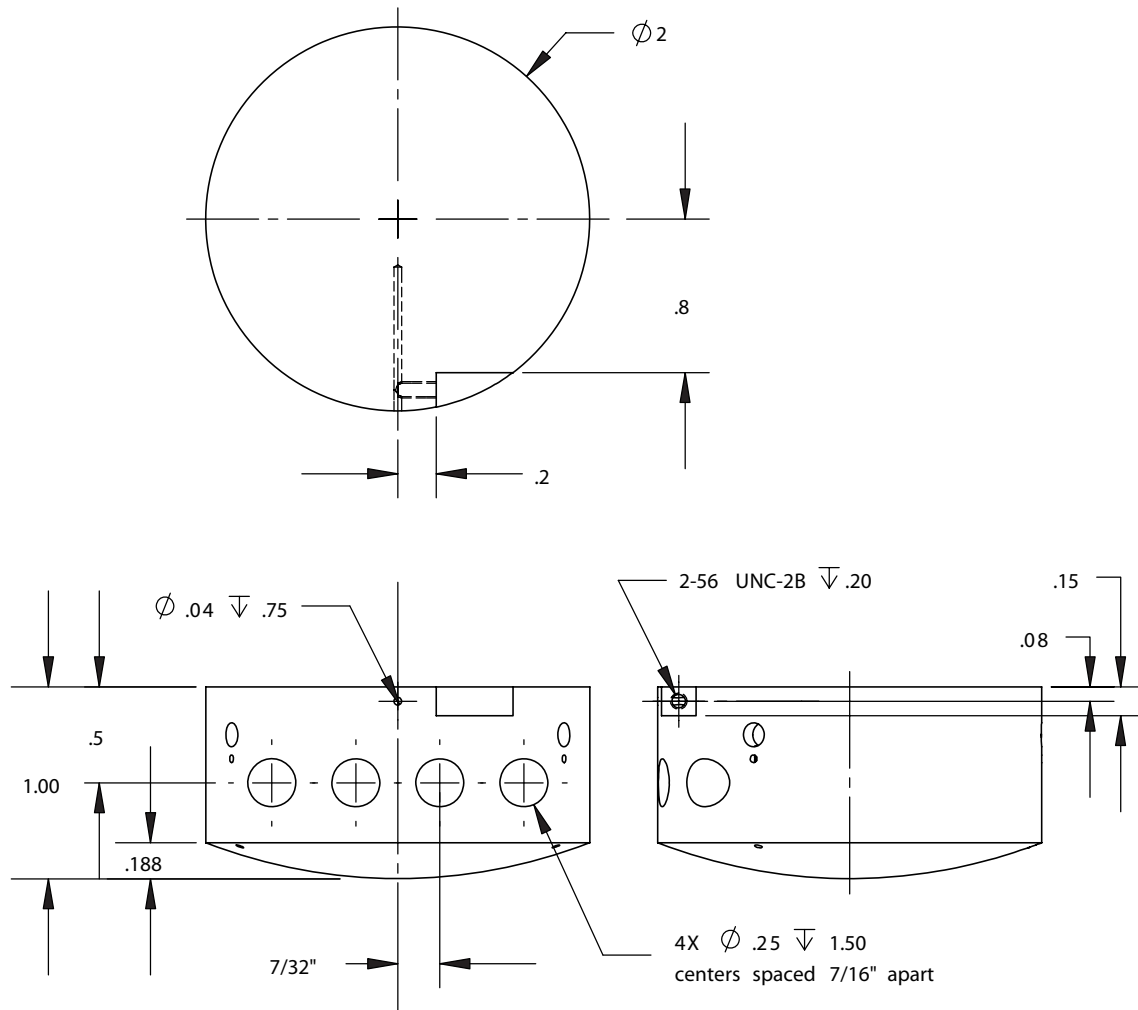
Drawing of the second generation top steel heated platen. Dimensions in inches unless otherwise noted.
